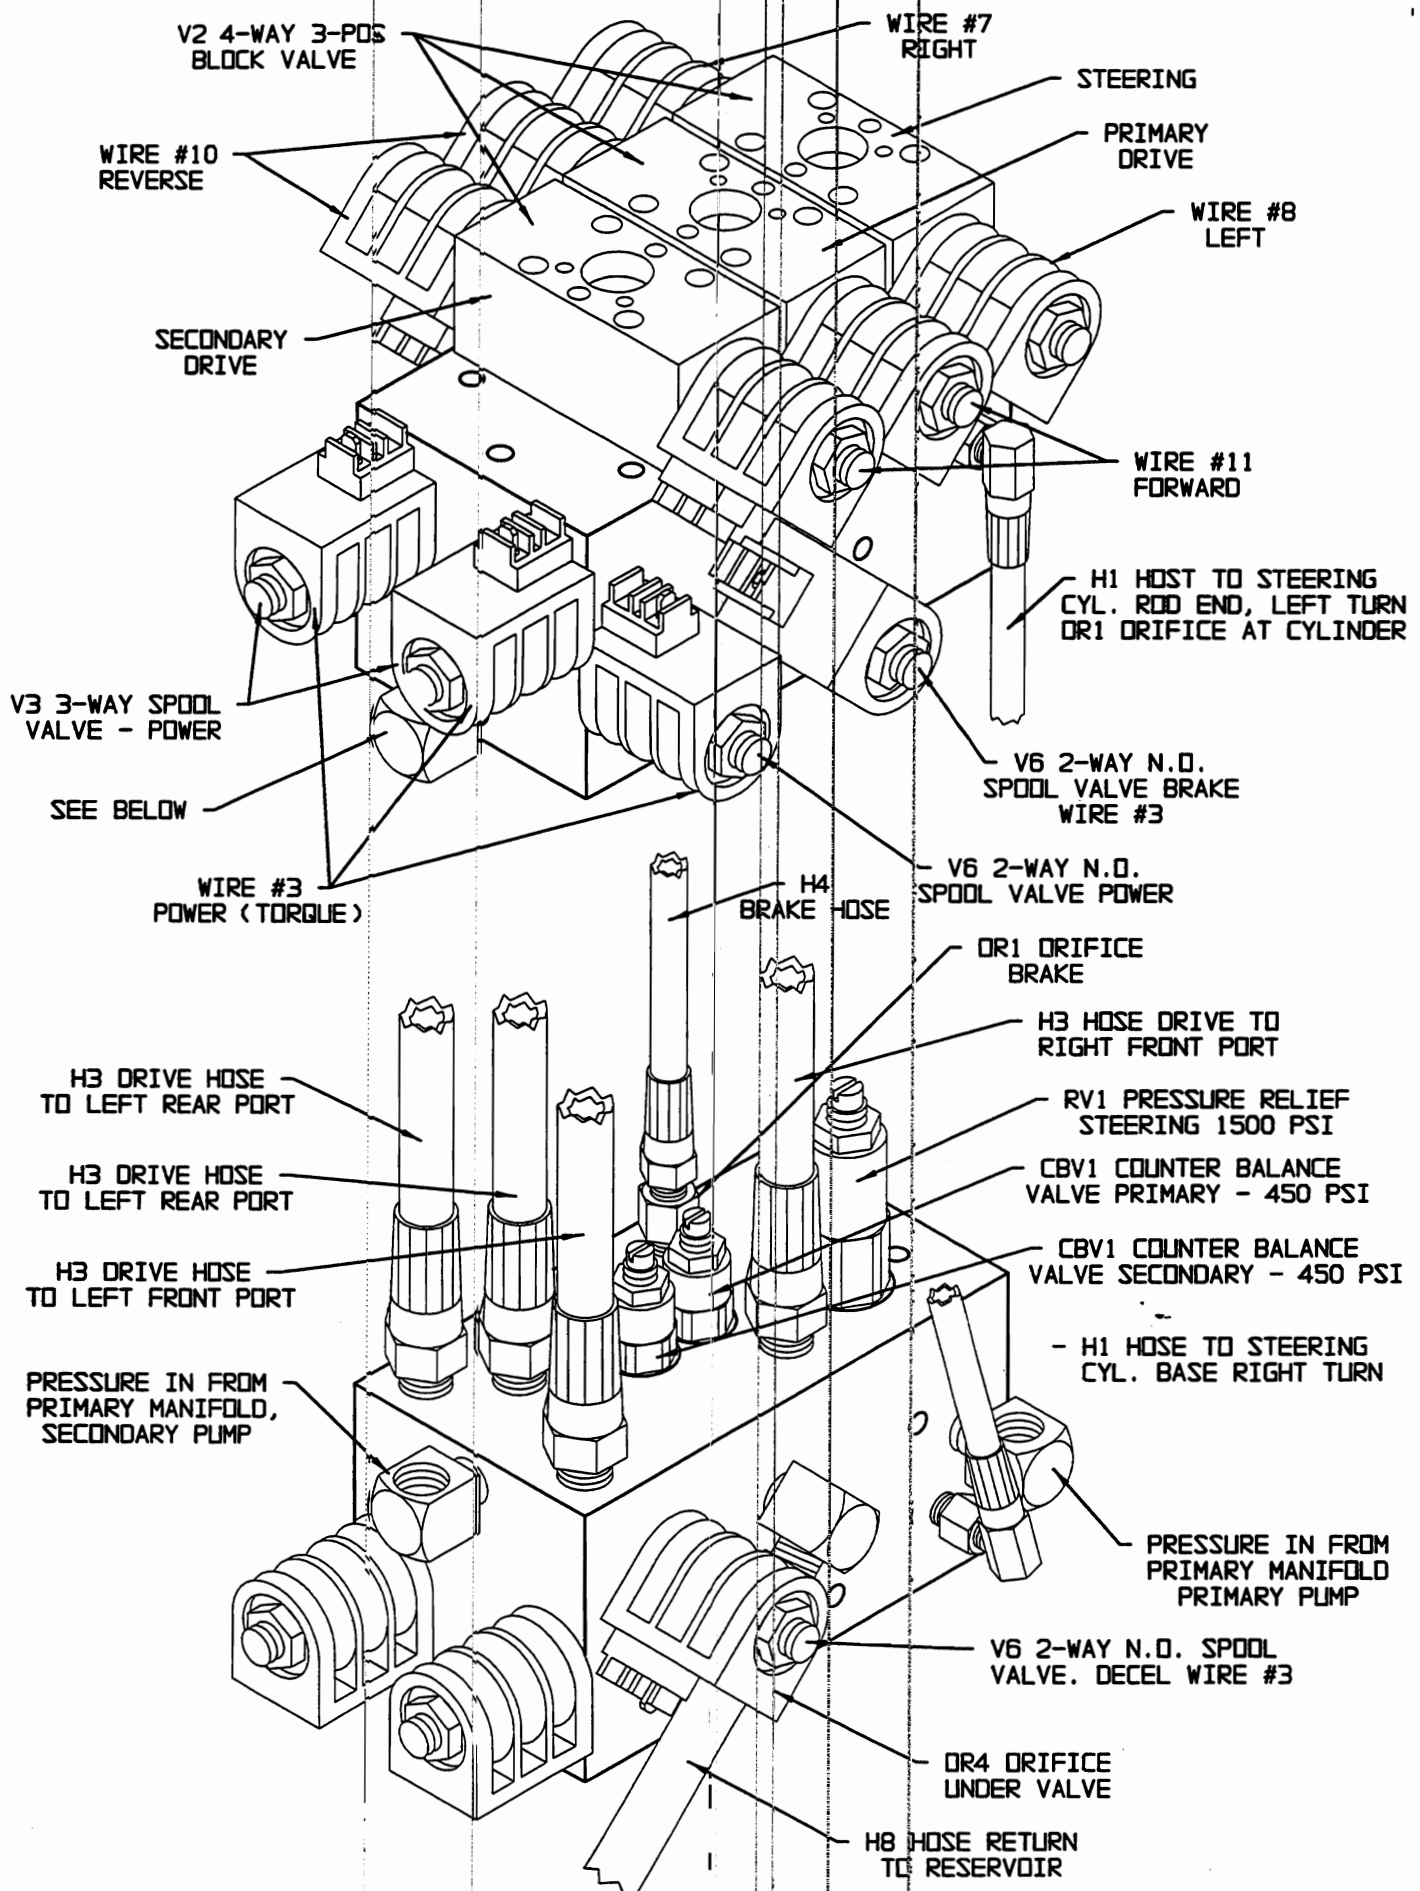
Dual Fuel Secondary Manifold Assembly
